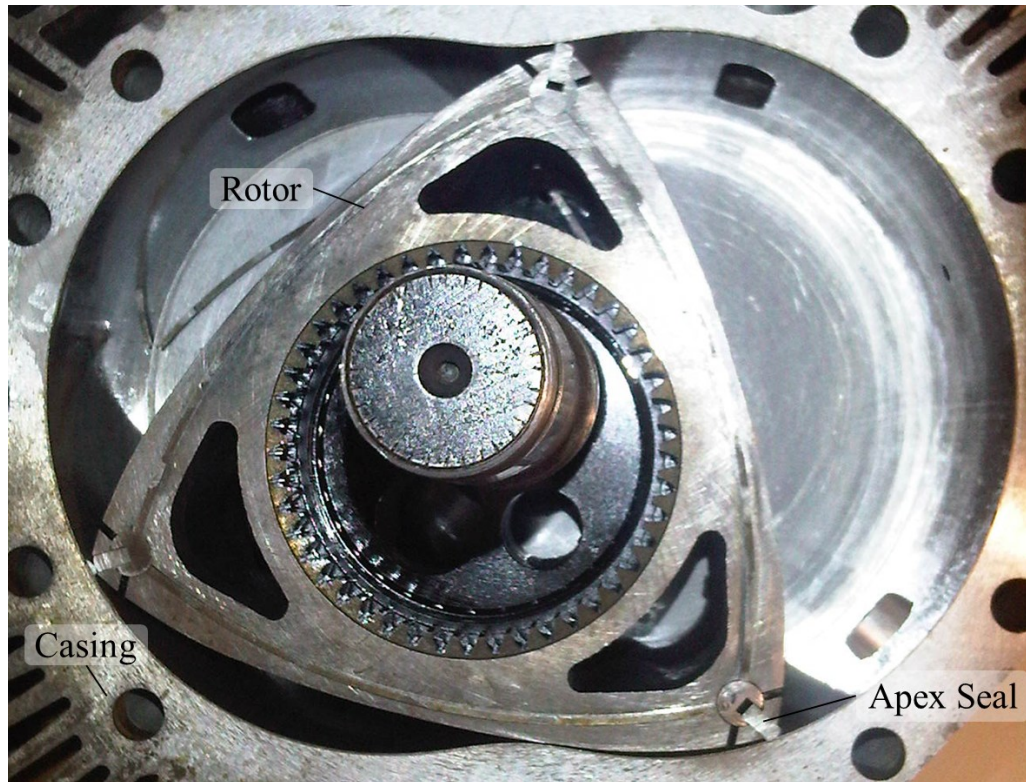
Wankel engine, illustrating the rotor, casing and apex seals.
